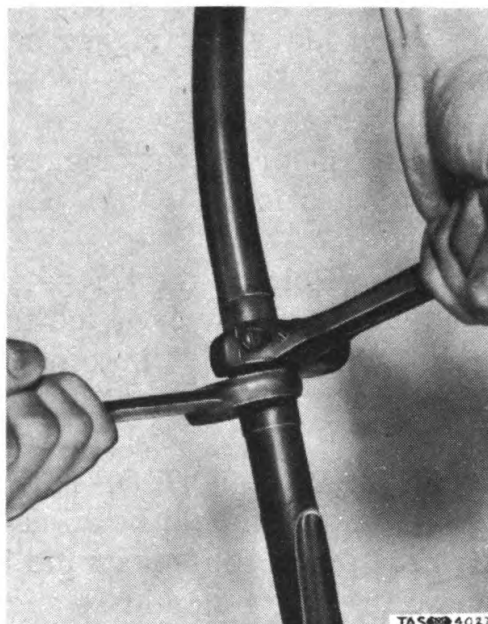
Use of Two End Wrenches to Tighten Joint between Fuel Hose and Fuel Discharge Valve.
